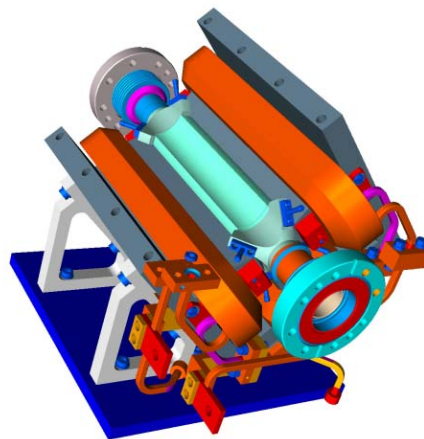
Drawing of a TTF2 stripline installed inside a quadrupole magnet.
